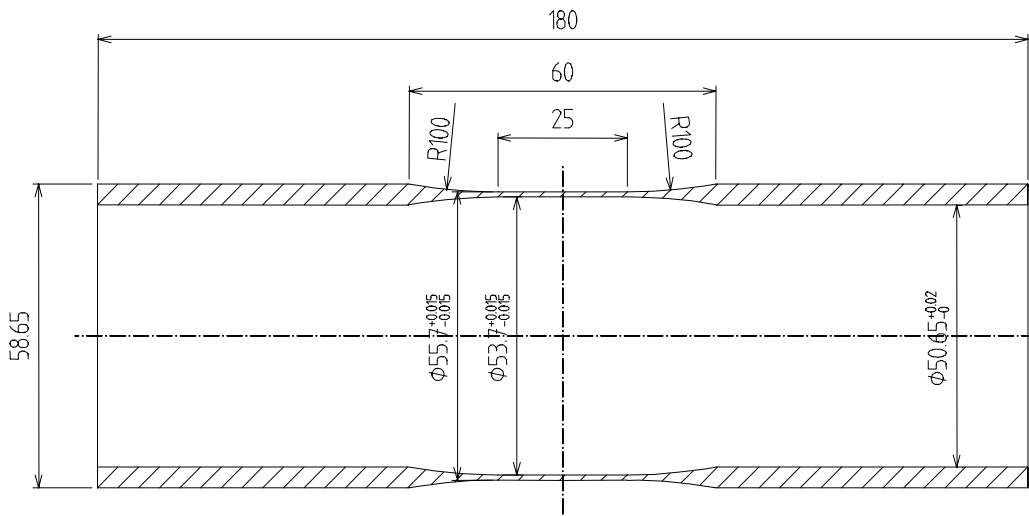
Shape and dimensions (in mm) of the developed specimens for the preliminary multi-axial tests.
